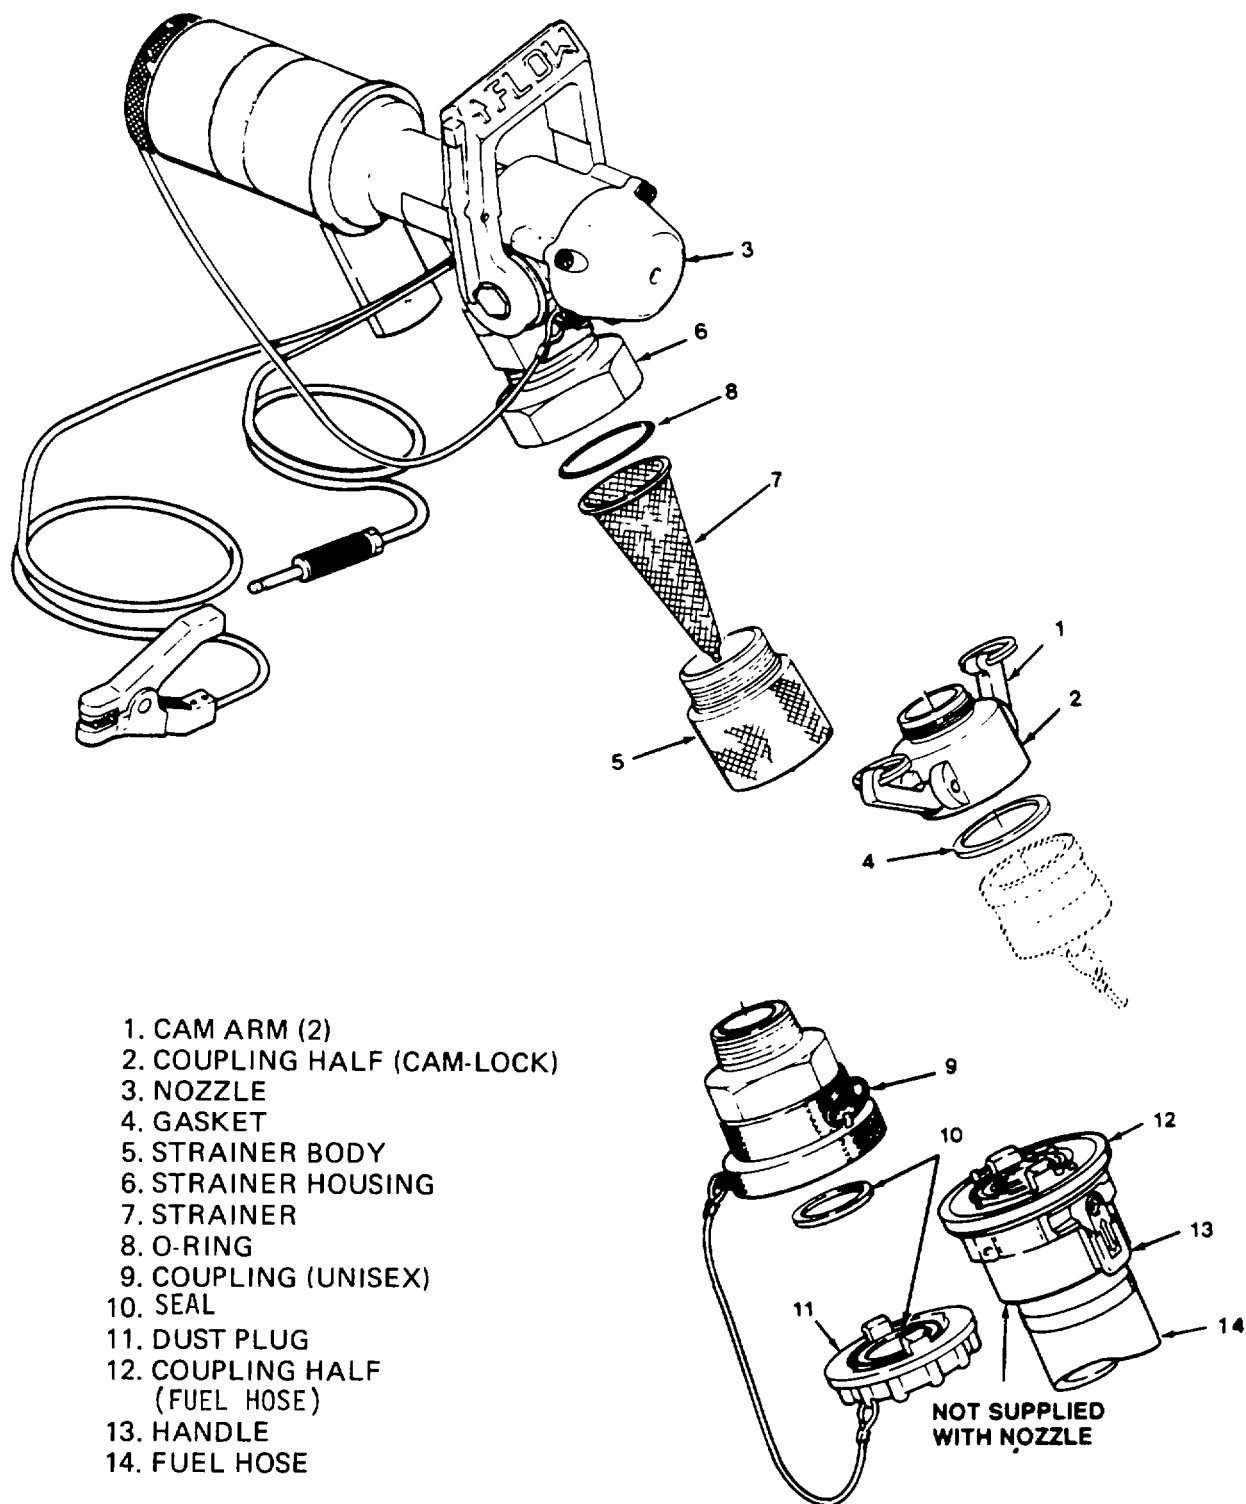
Coupling Gasket, Strainer, and O-Ring Replacement.
